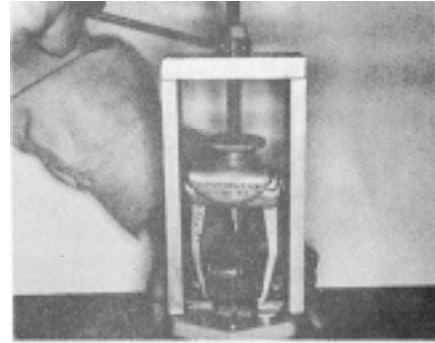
, F538. Using ST-709 to pull governor weight assembly
